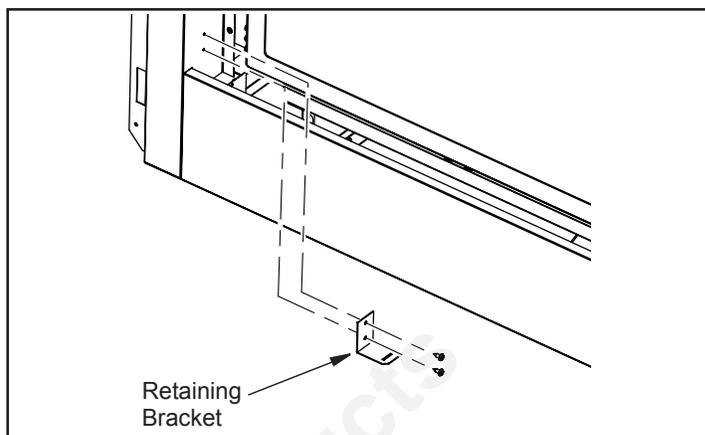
Installing Access Door Retaining Brackets for See-Thru Applications
